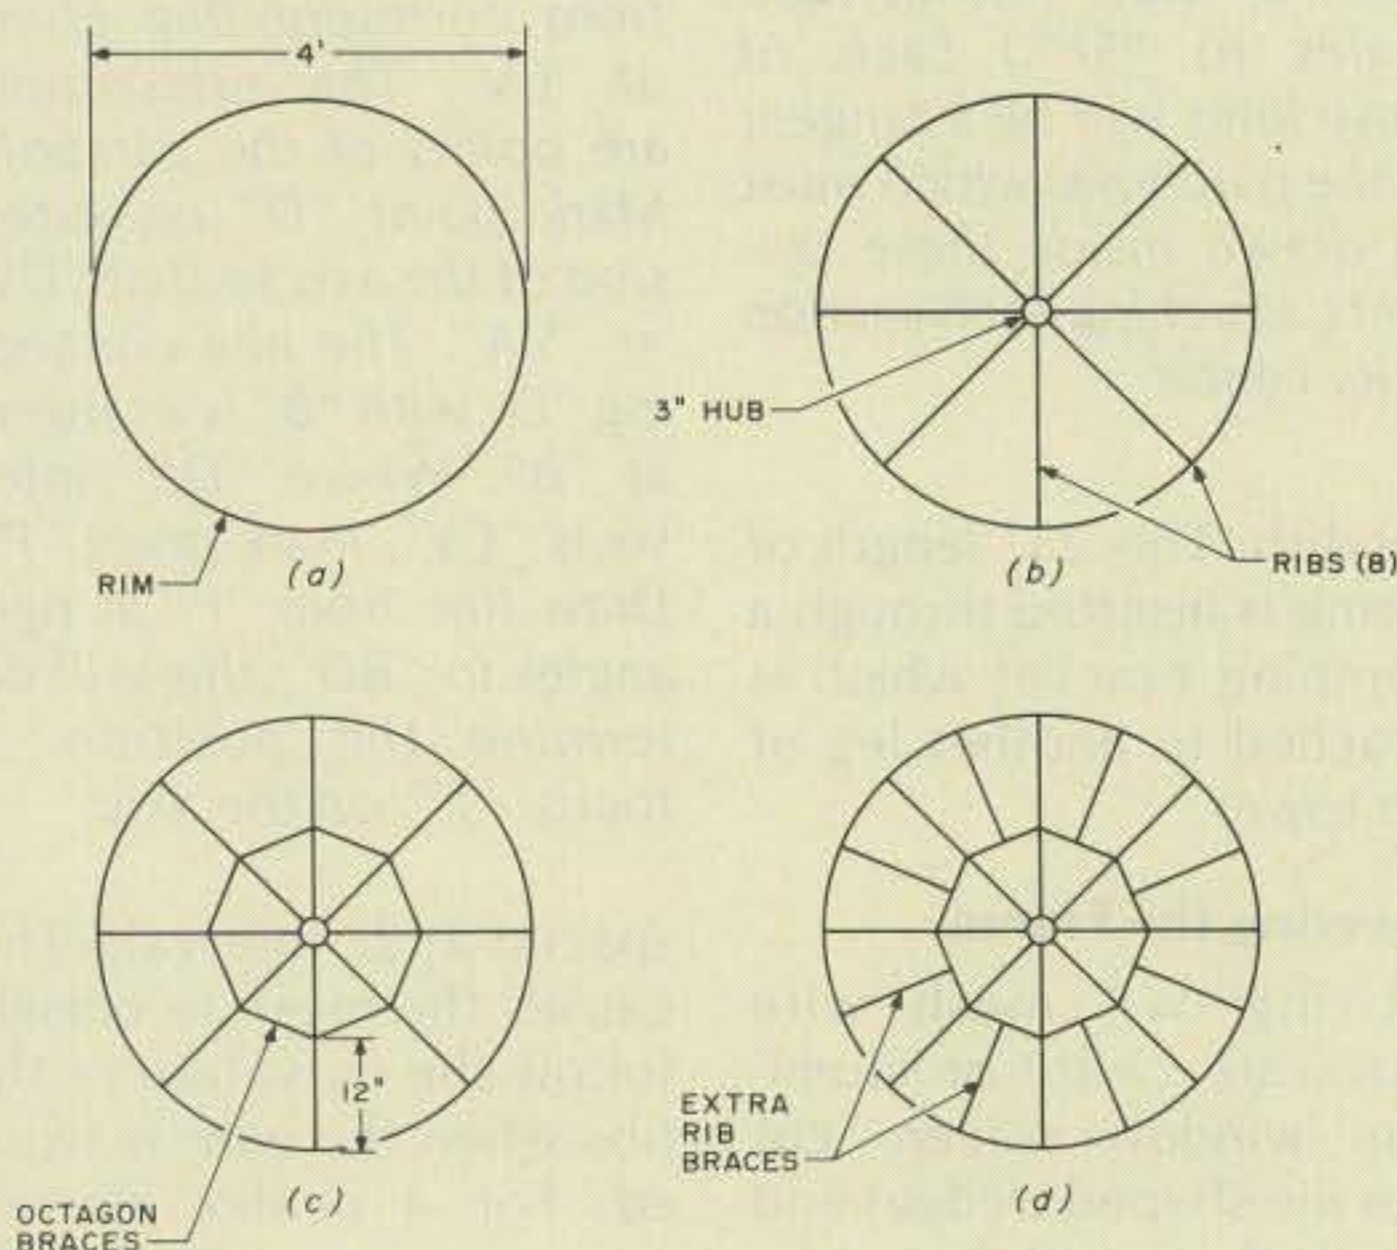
(a) Rim dimensions. (b) Spoke installation. (c) Octagonal bracing placement. (d) Installation of extra rib braces.
